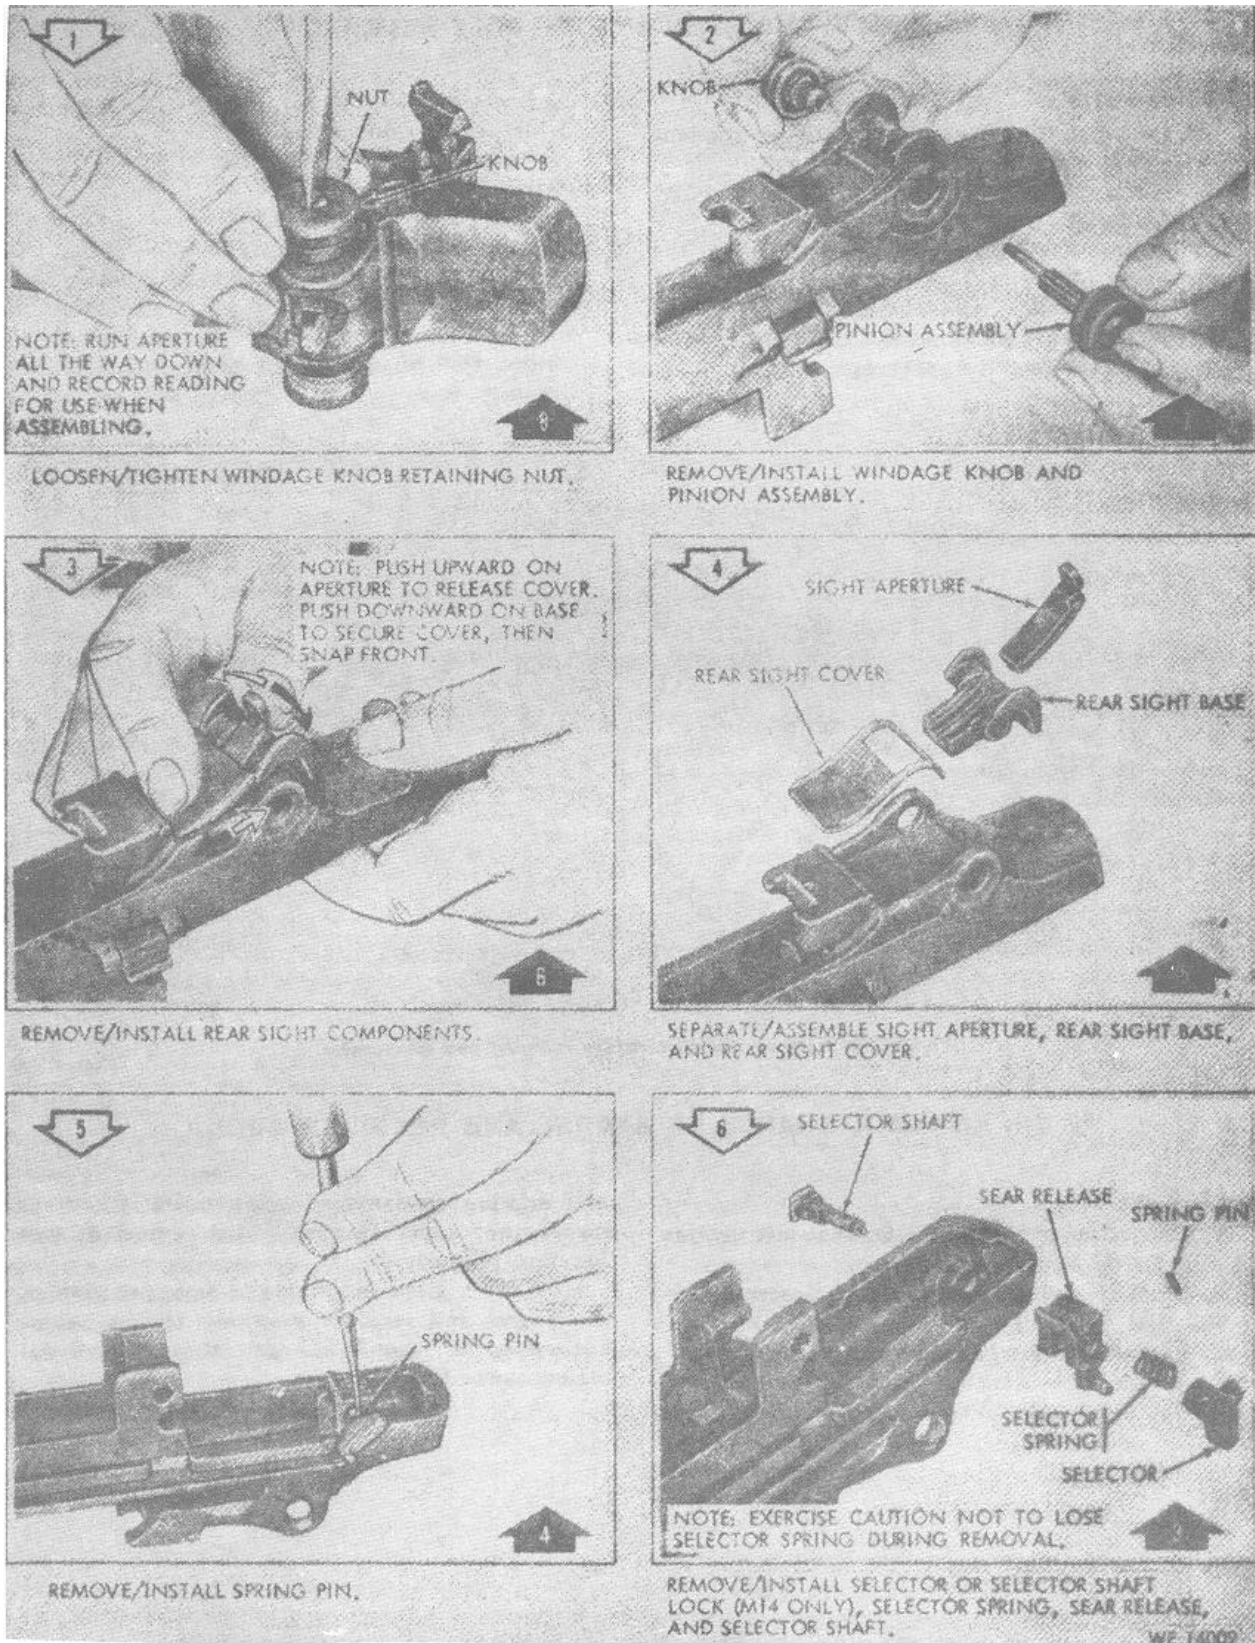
Remove / install component of the barrel and receiver assembly.
